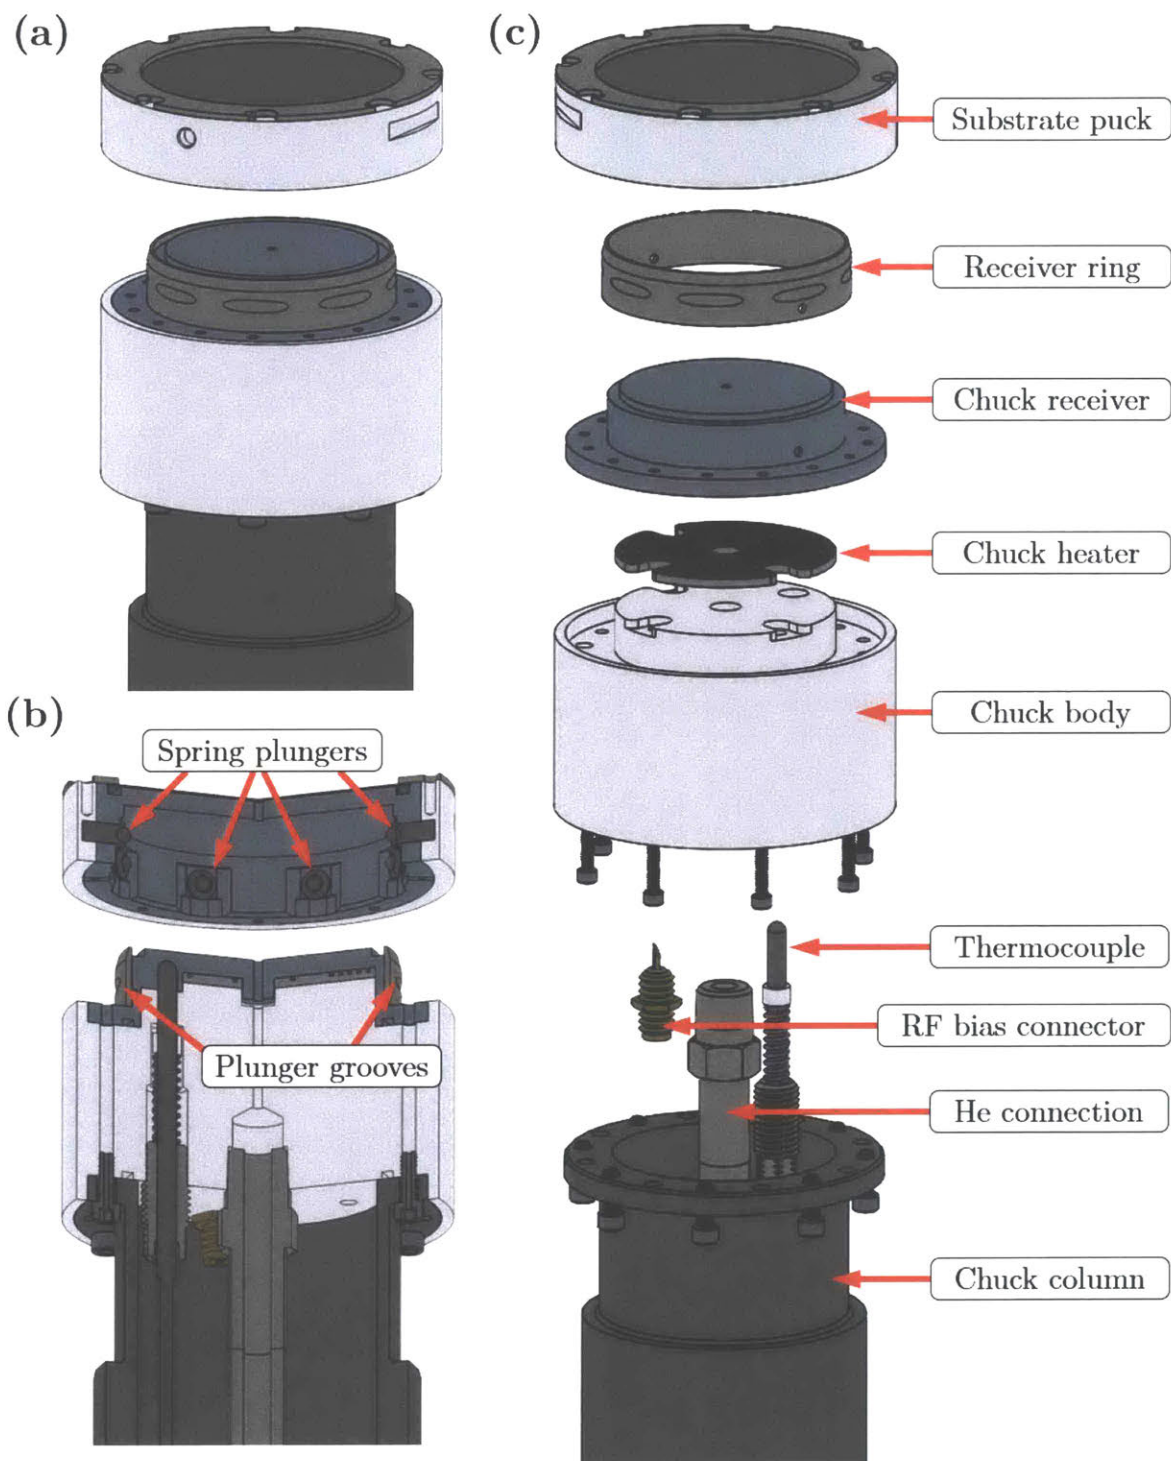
Renderings of the SCA. (a) The assembled SCA and substrate puck; (b) Cross-sectional view of SCA and puck showing the positions of the spring plungers and mating grooves; (c) Exploded view with labels for key components.
